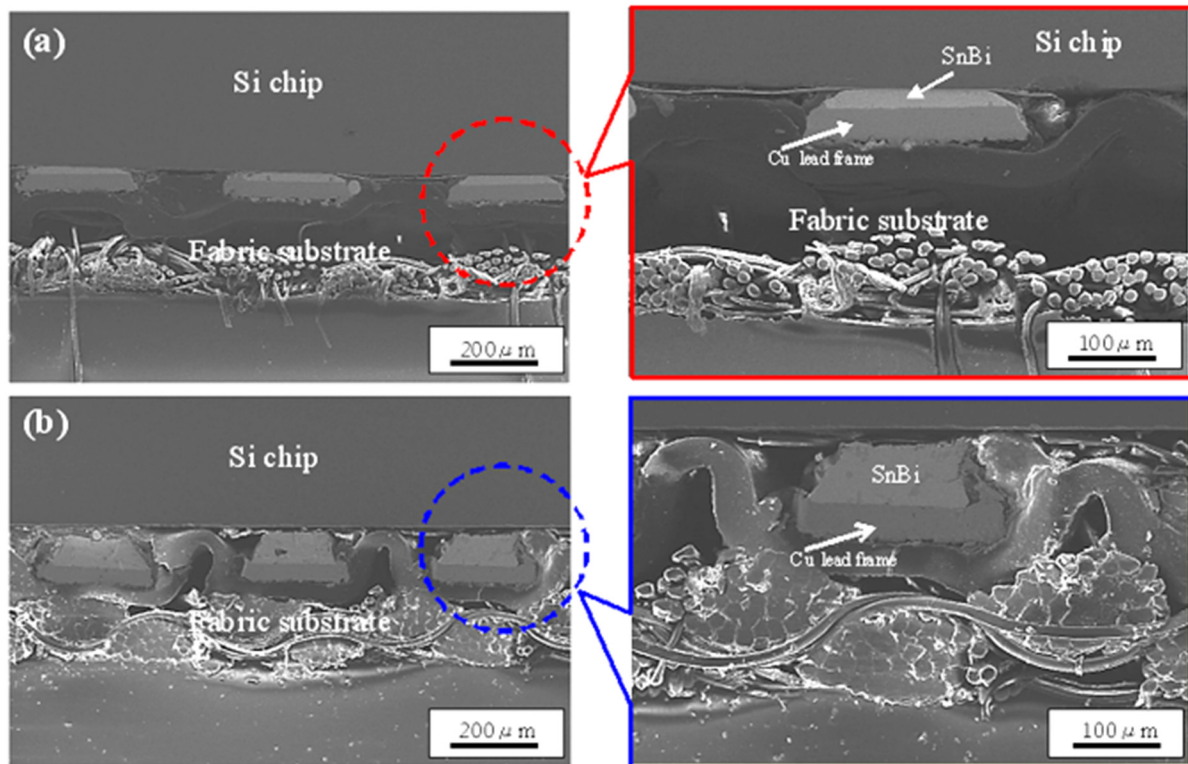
Cross-sectional scanning electron micrographs of the flip-chip joints formed by flip-chip bonding of the SnBi solder bumps to the Cu lead frame of the fabric substrate (a) without and (b) with a ball-up process of the SnBi solder paste, reproduced from [16], with permission from Journal of Korean Microelectronics and Packaging, 2012.
